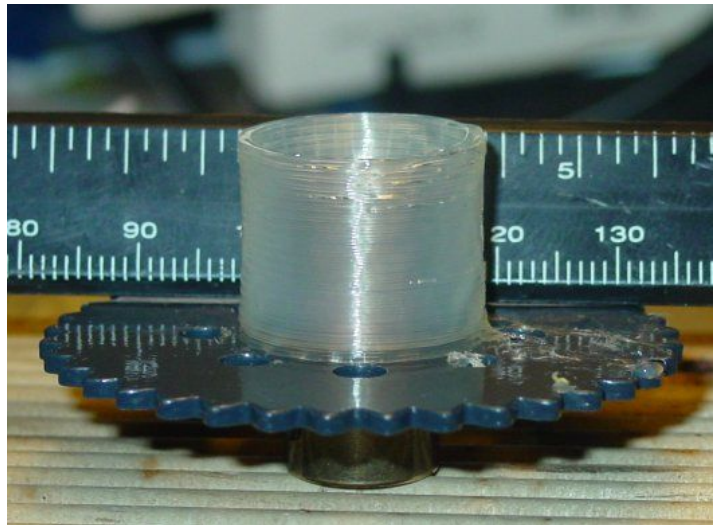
Turntable wheel removed from machine to allow photographing against a millimetre and inch scale. The cylinder has 0.85mm thick walls, 19.5mm in diameter and is 18mm high.
